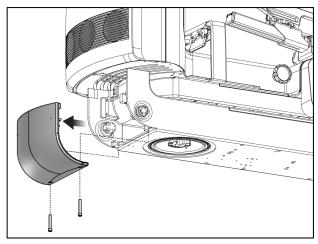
Removal of Detector-end cover of Tube Arm Mechanism
